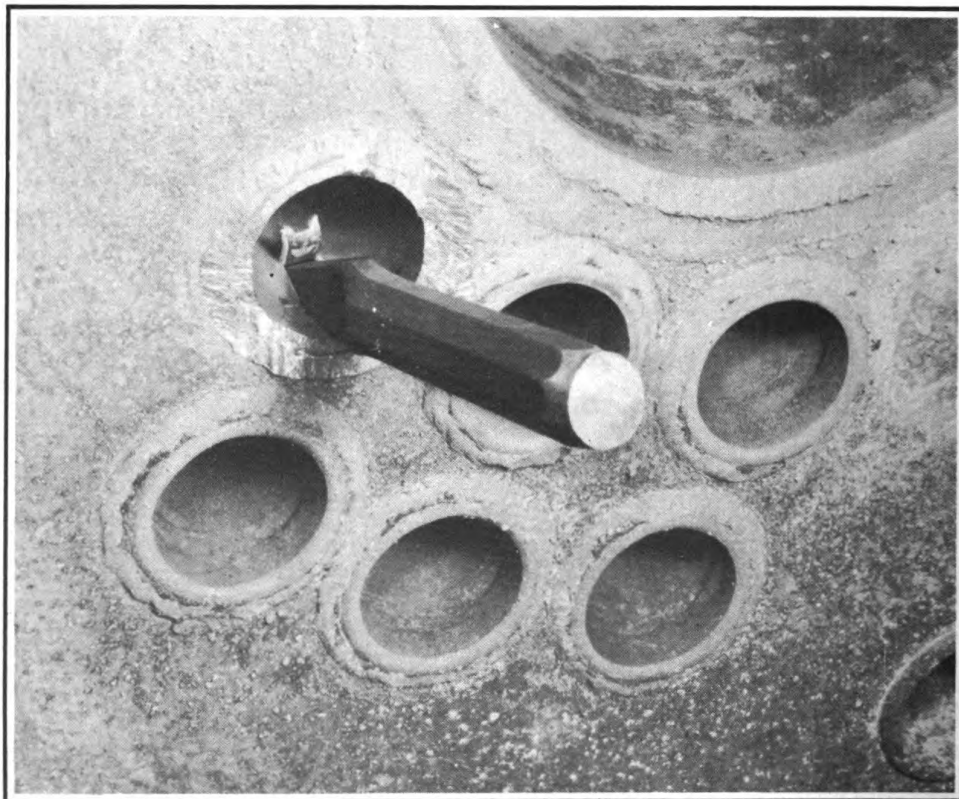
Cutting Slit in Tube End With Cape Chisel
